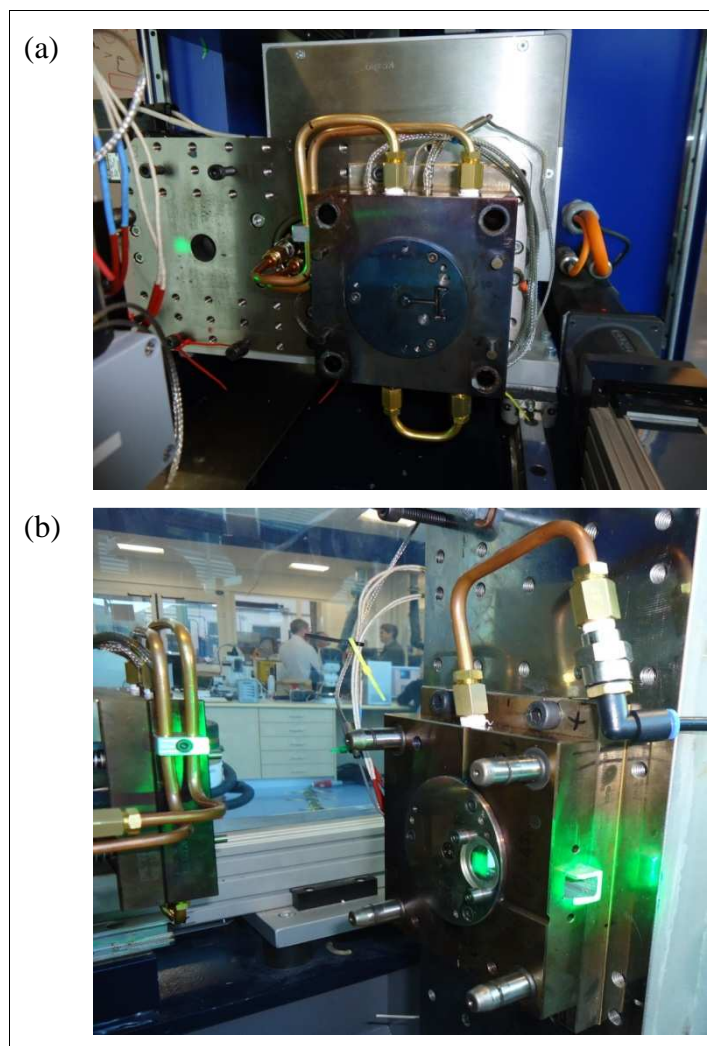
The new RHCM mould. a) The rotating part b) The fixed part.
